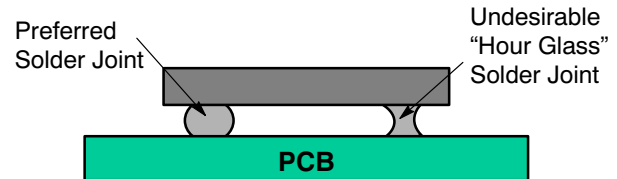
Side view of NIS6111 illustrating preferred and undesirable solder joints.
